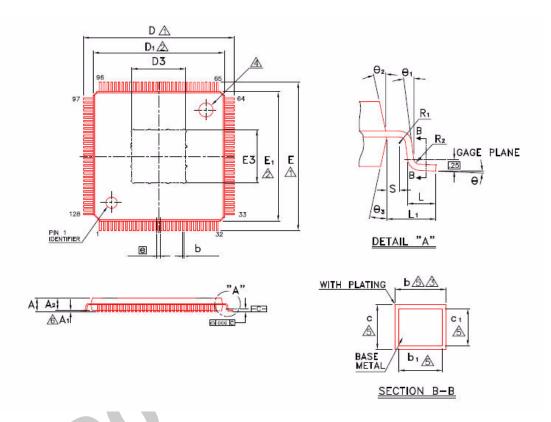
128 pin LQFP-EP (Exposed Pad) Package Drawing
